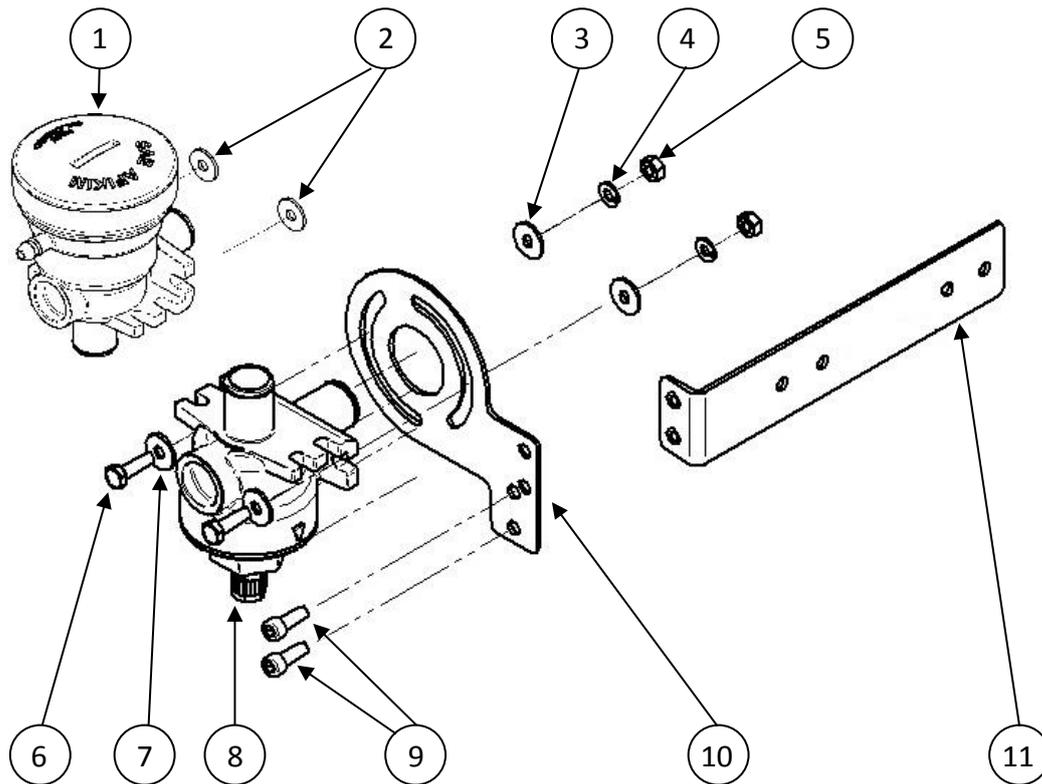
Parts for Attaching Vacuum Shut-Off Valve
